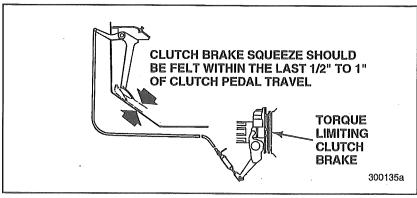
Clutch Brake Squeeze (Spicer Solo™)
